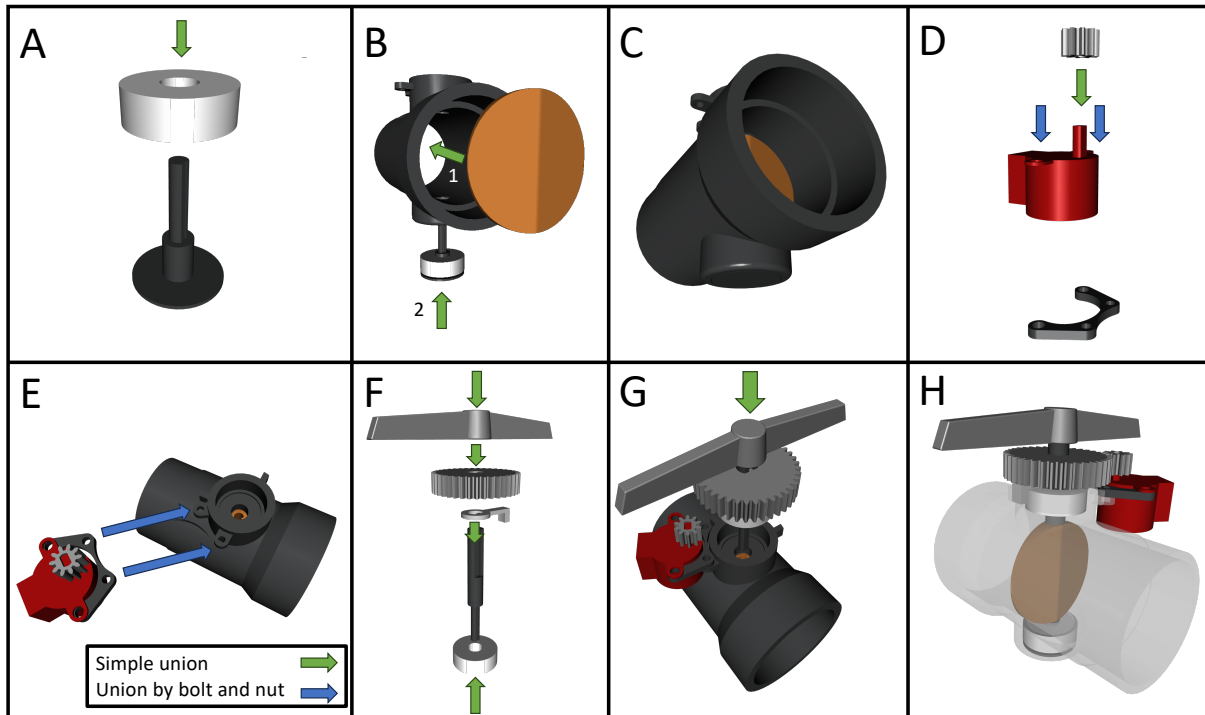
Assembly of the valve: A) Insert the Pin into the bearing. B) Place the Disk inside the ValveHousing, then pass the Pin through the Disc, pressure-fitting the bottom bearing into the housing. C) View of the current state of the assembly. D) Insert the ValvePinion into the motor shaft, then mount the MotorLink using 2 M3x10mm screws. E) Mount the motor assembly to the housing using 2 M3x10mm screws. F) Assemble the valve shaft by fitting the bearing into the Shaft, then the BallStop, the Gear and the Handle. G) Insert the shaft assembly into the housing and the disc, pressure fitting the bearing. H) Transparency view of the full valve assembly.
